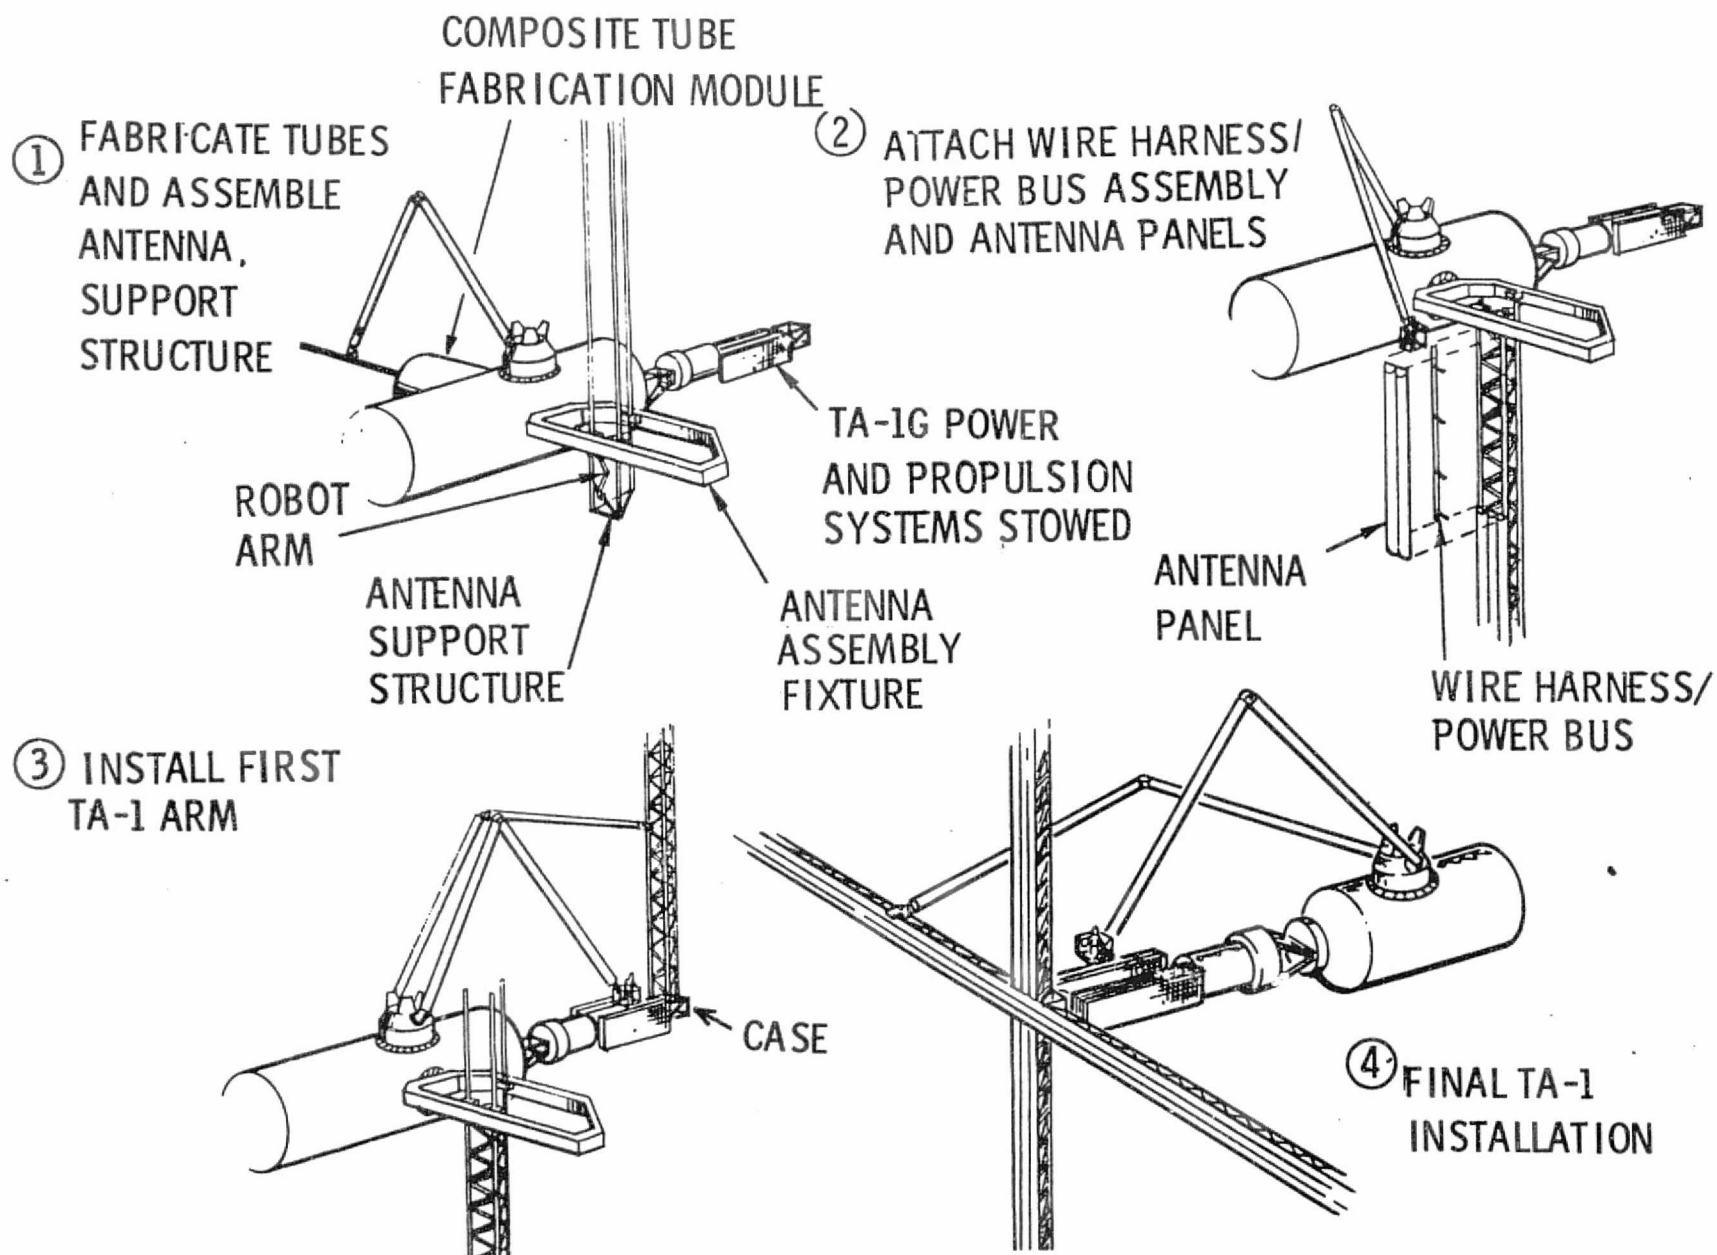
SPS TA-1L Assembly Sequence
